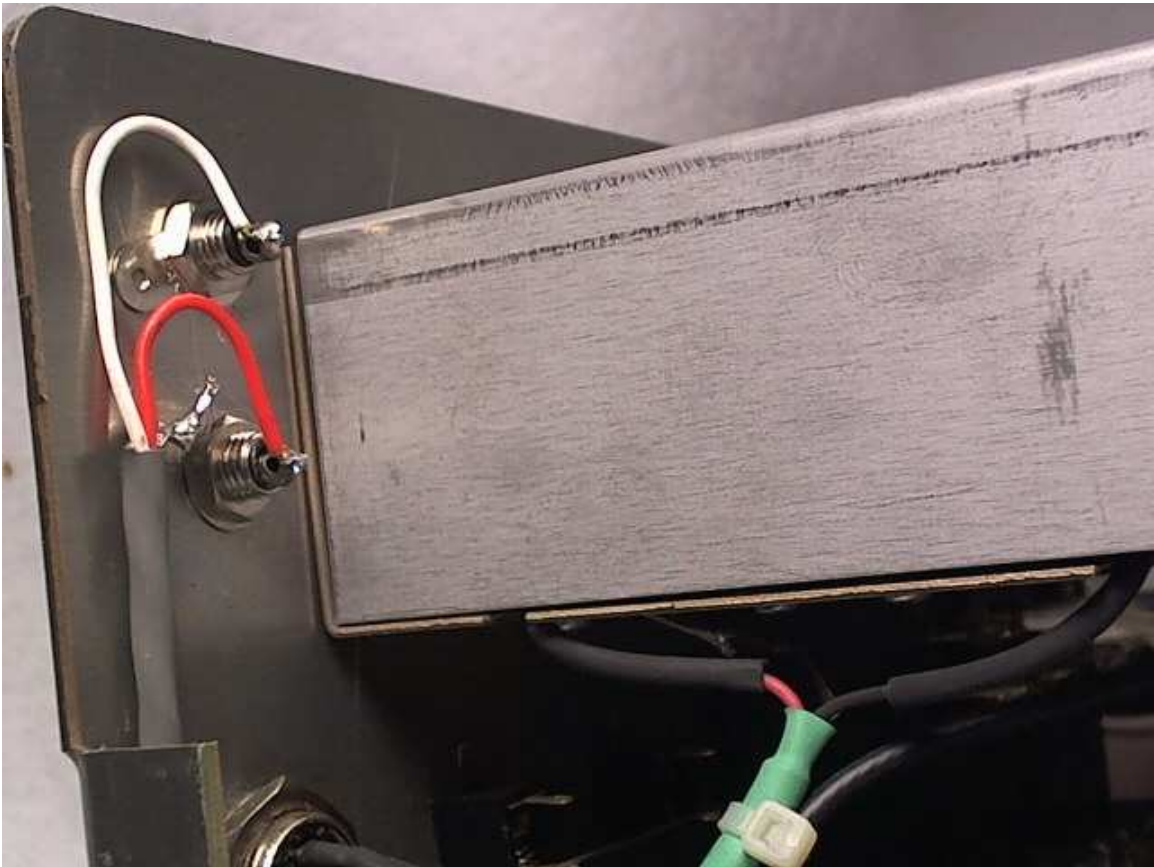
AT-AUTO_(tm) Soldering Wiring Harness to RCA Jacks
